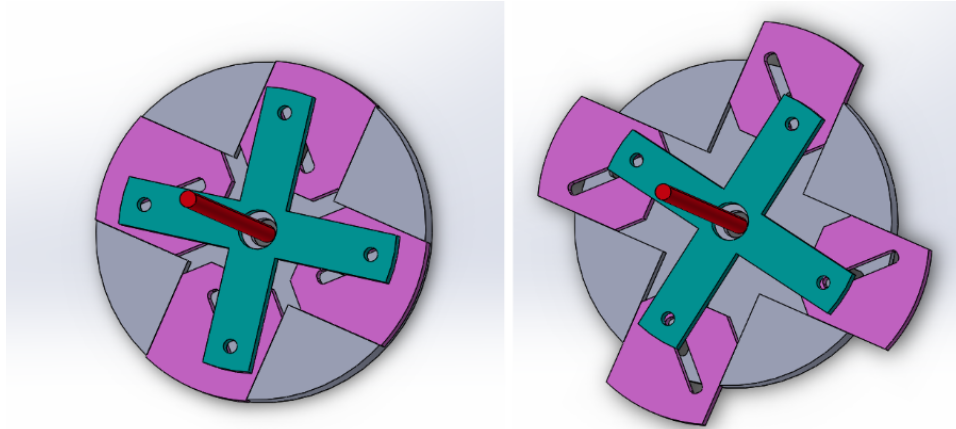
CAD Model of the Radial Displacement Mechanism
